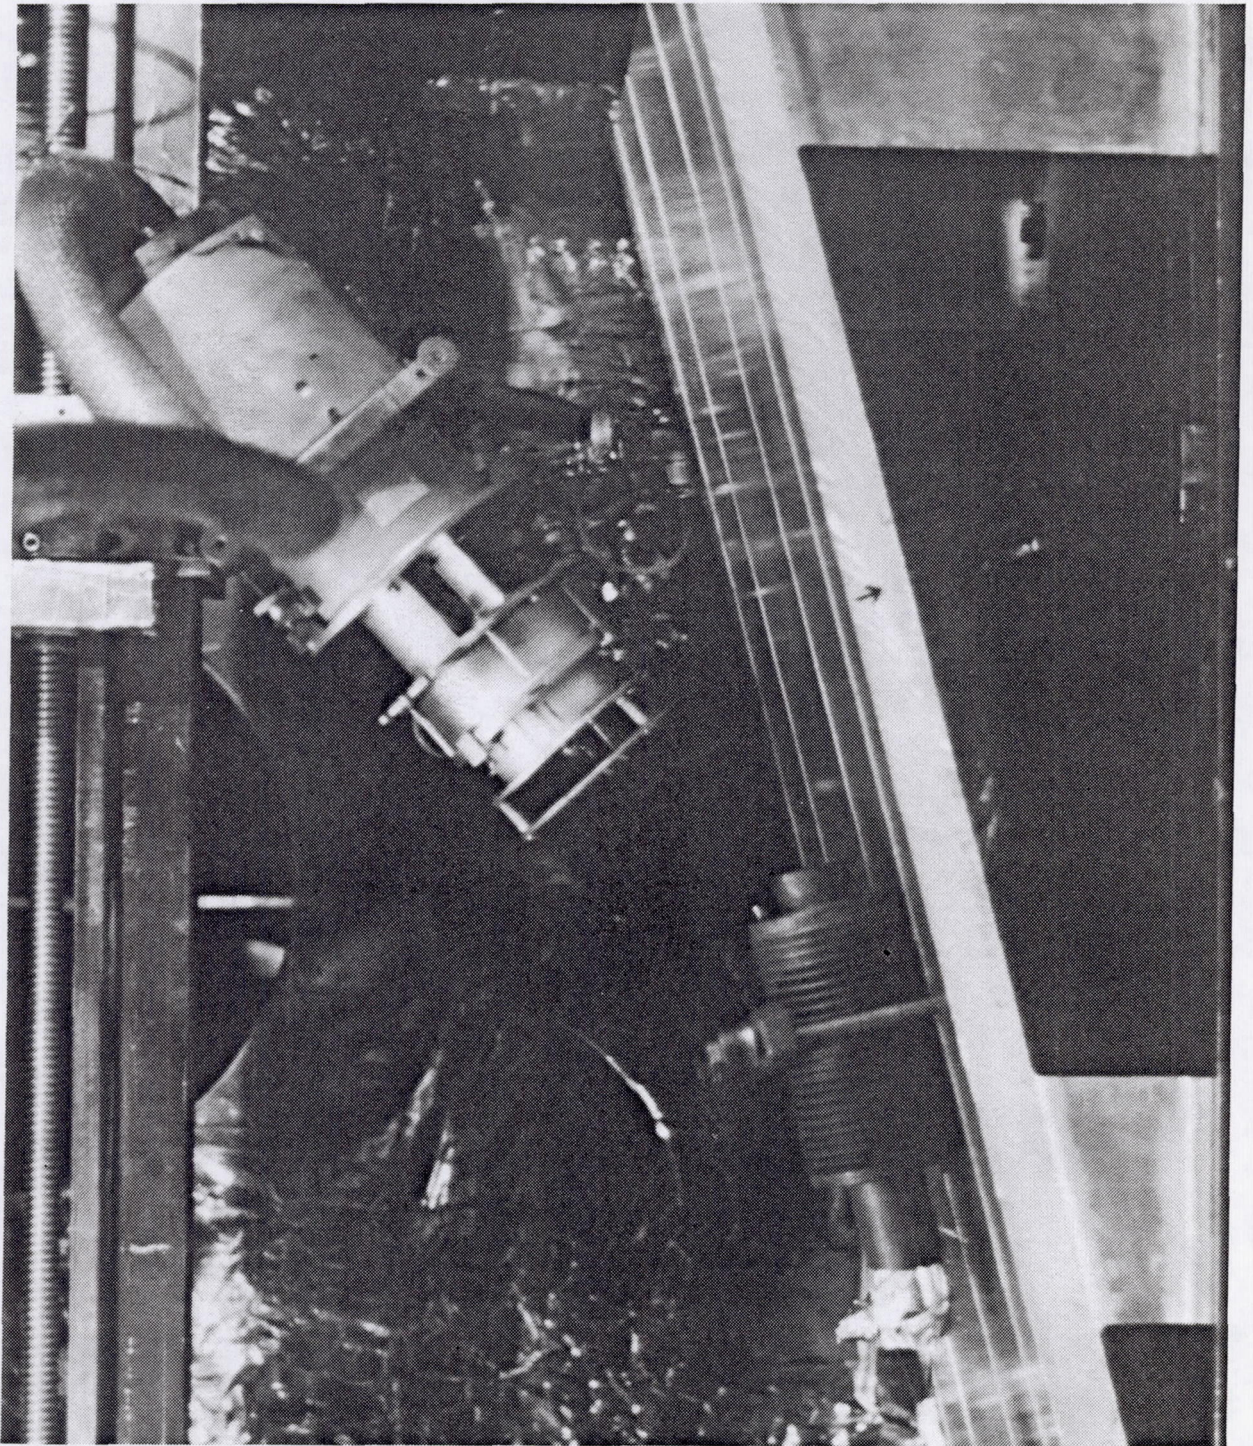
EB Welding PCM Fill Tube Seal on a SDHRT Test Canister
